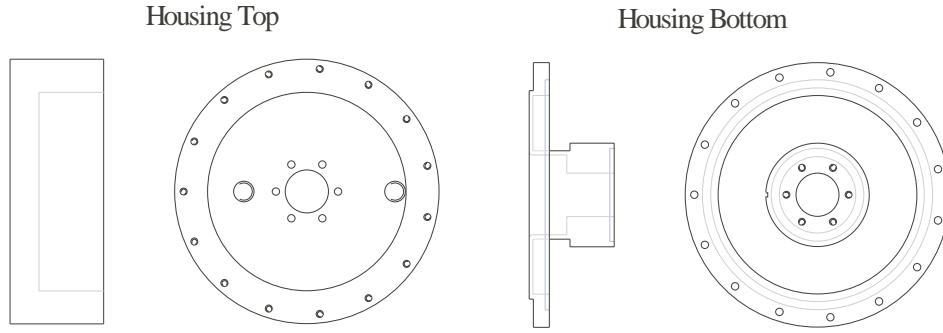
Scale drawing of the housing for the MOT and bias coils. Top and side views are given for the top (left) and bottom (right) sections of the housing.
